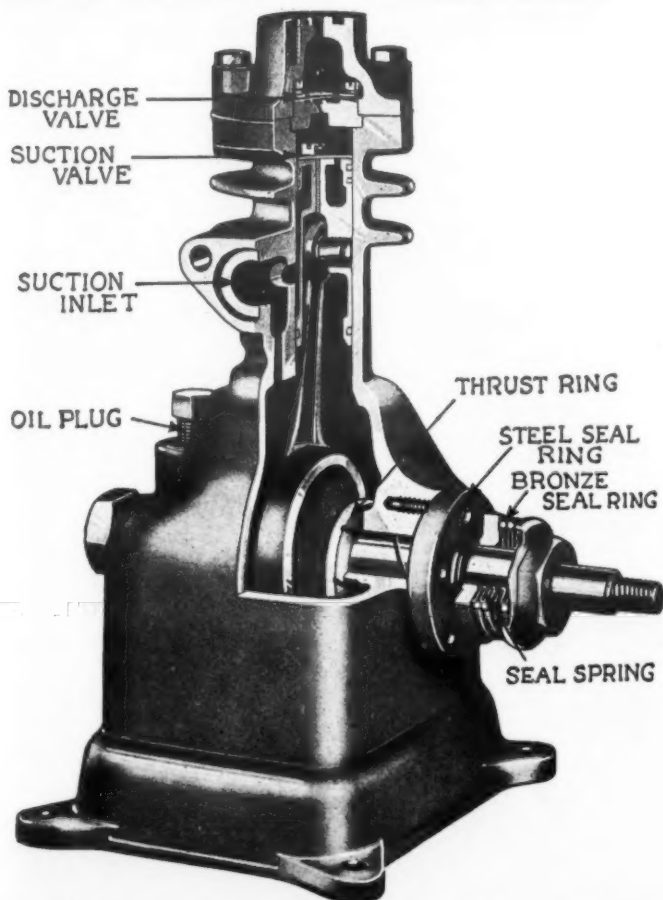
The above drawing shows the main parts of Servel's eccentric-type compressor using a revolving shaft seal.
